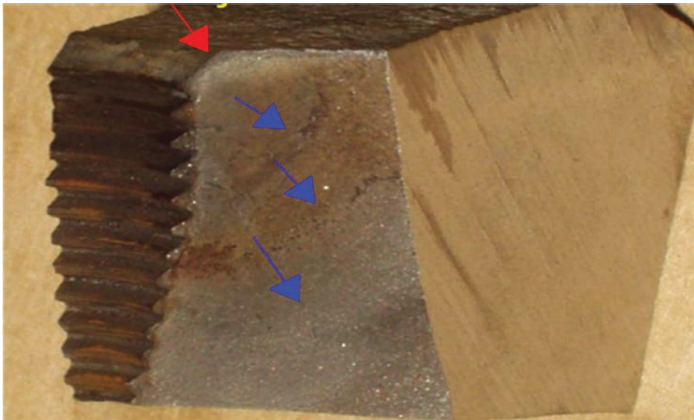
Section of screw cracked area (Source: MIB-0058-17 report)
